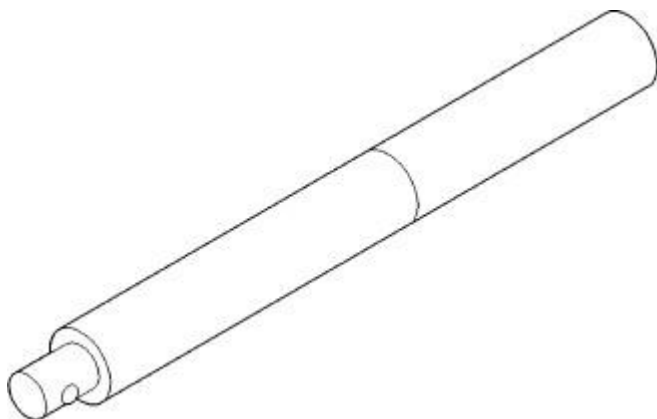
DRIVER HANDLE, UNIVERSAL - C-4171
